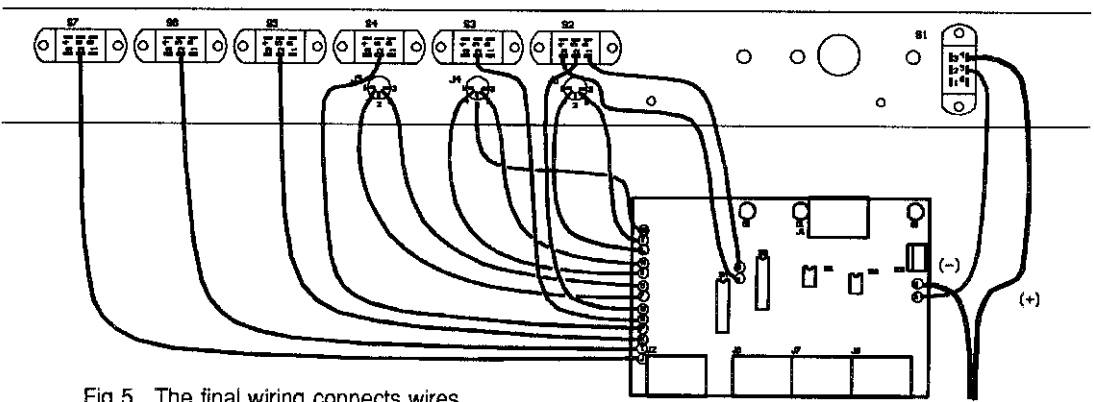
The final wiring connects wires previously soldered to the circuit board to the front panel components. Previous wiring has been eliminated for clarity.
